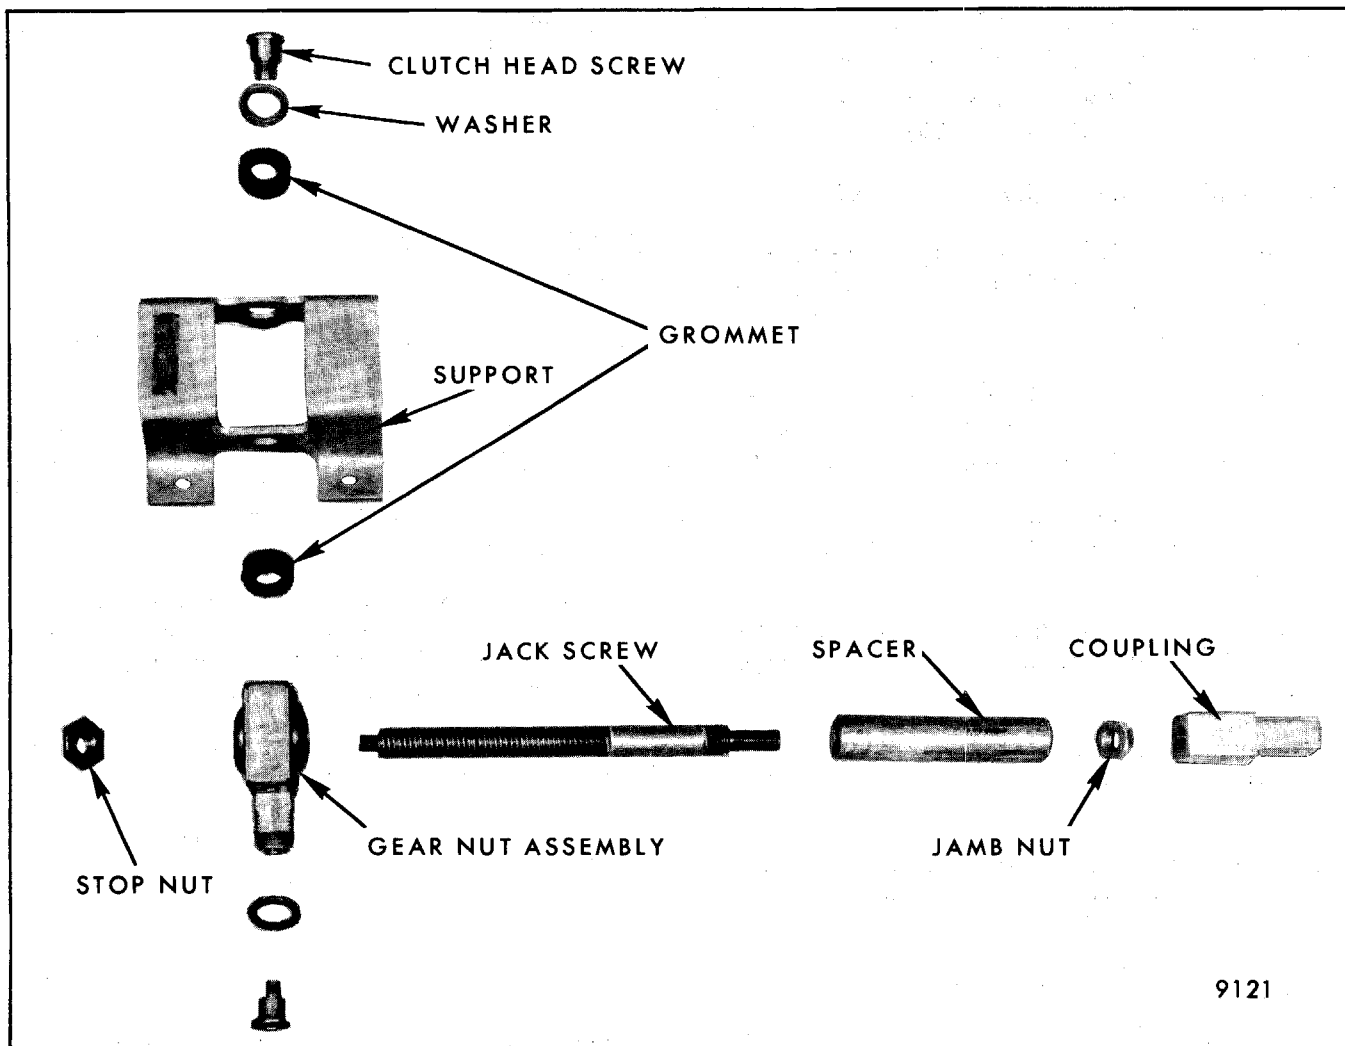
Power Reclining Seat Back Actuator - Disassembly and Assembly
